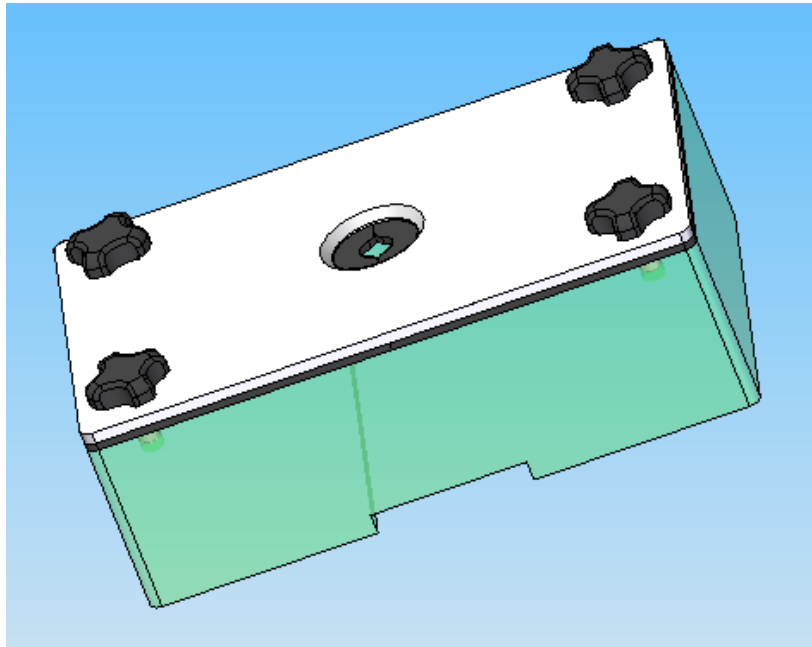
Concept Two, using rubber to hold O-rings
